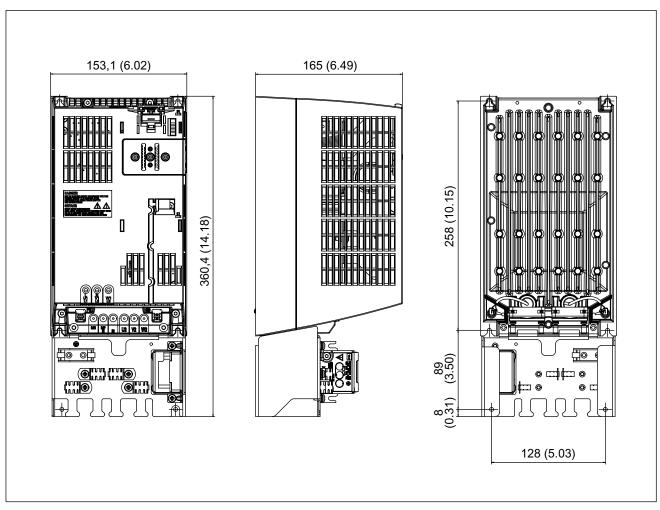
Dimension drawing: Power Module PM340 with Screening Kit and Brake Relay, frame size FSB
